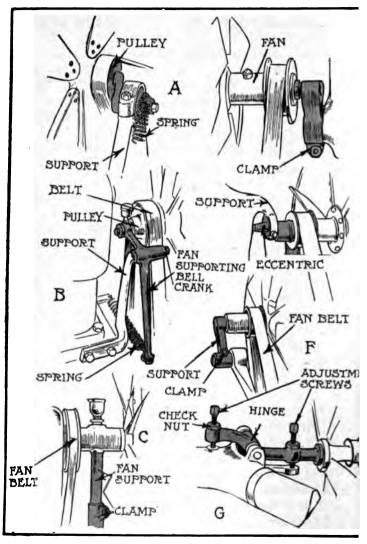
Methods of Adjusting Fan Belt Tension Outlined.
